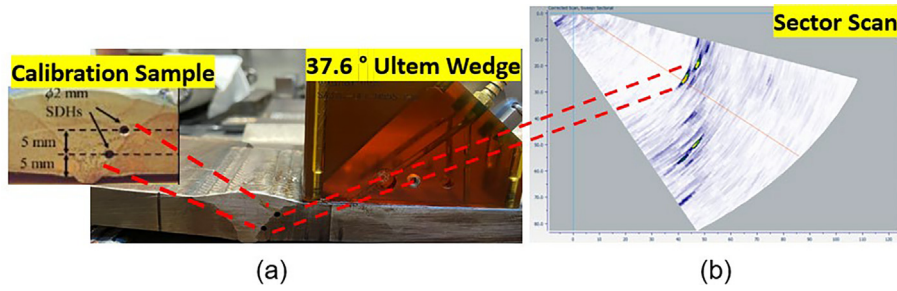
Gain calibration at 55 dB using a welded sample with two side-drilled holes of \varnothing 2 mm for PAUT-NDT inspection.
